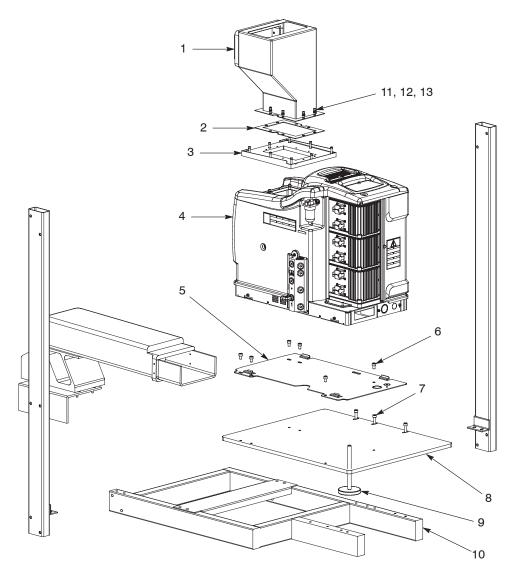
Installing the automatic hopper/feeder on a P10 unit
